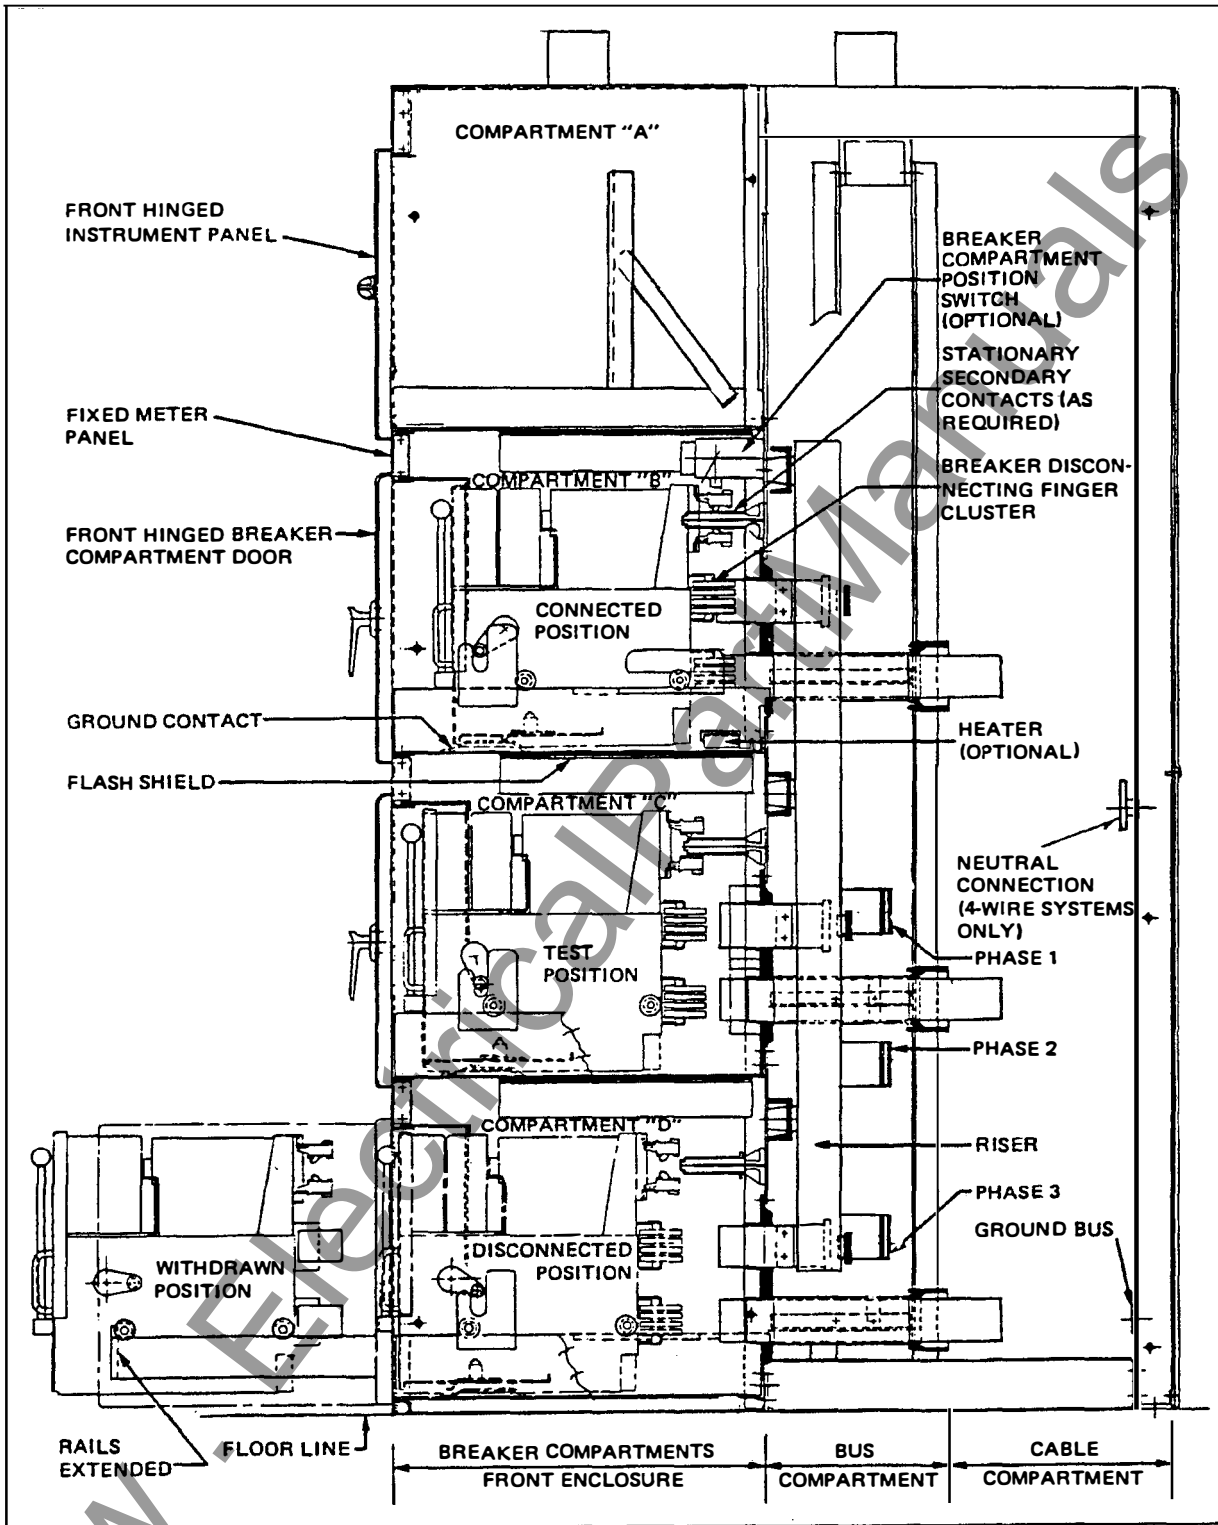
1600/2000 Ampere Vertical Section: Side View
